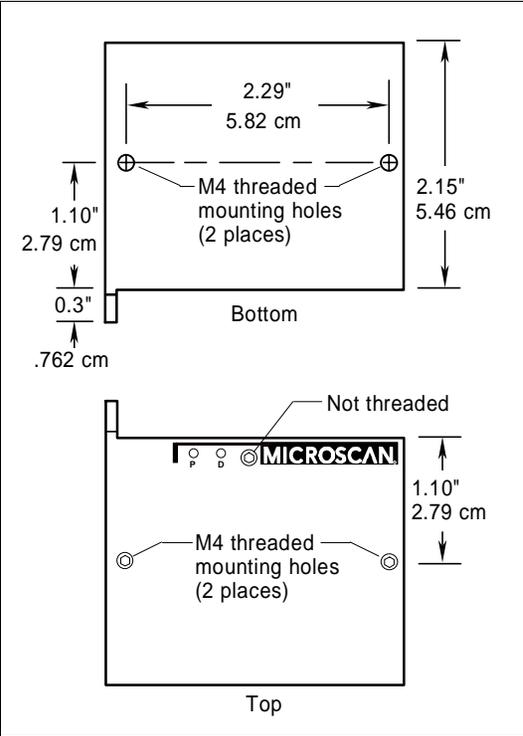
Mounting Holes and Dimensions (not to scale)
